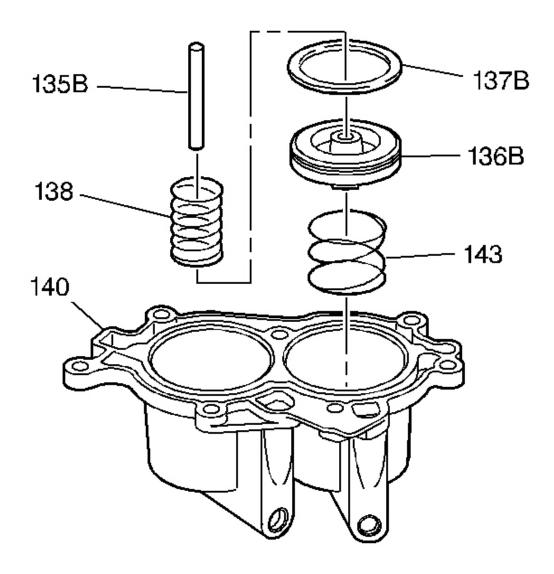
Locating 2-3 Accumulator Piston Components Courtesy of GENERAL MOTORS CORP.
